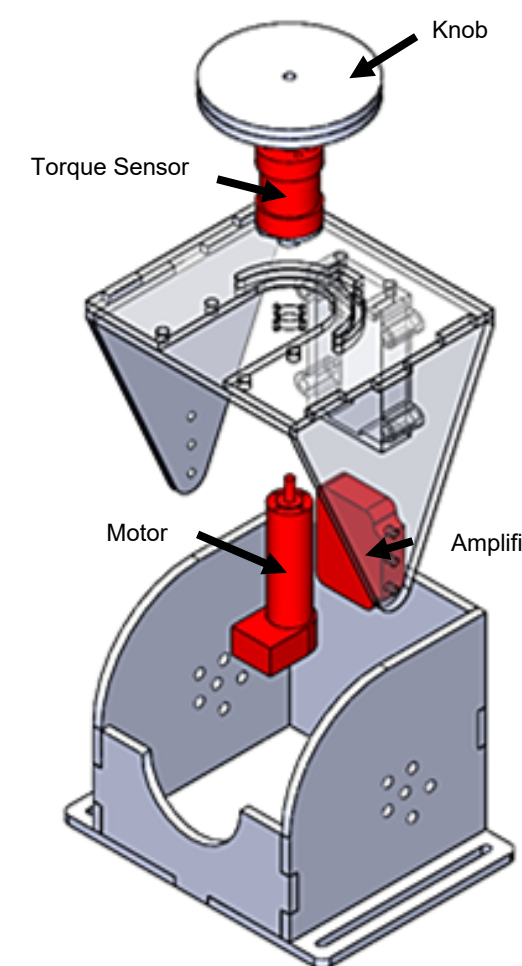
SolidWorks assembly of the device sans Arduino Mega and motor shield
